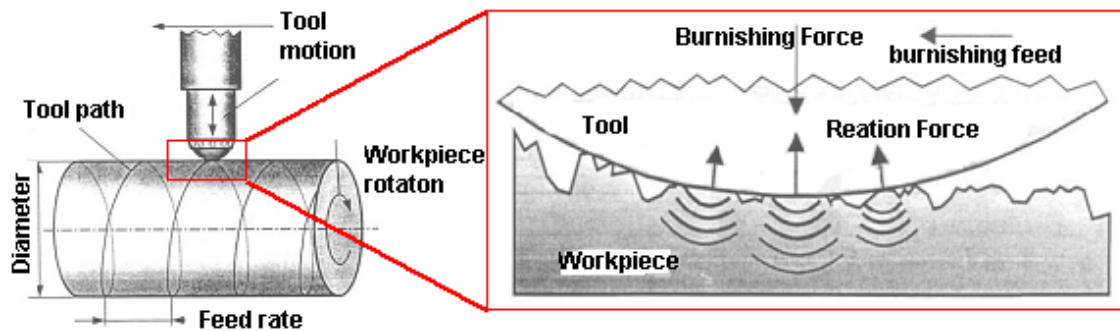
Roller burnishing with hydrostatic ball tool [Röttger, 2002]
